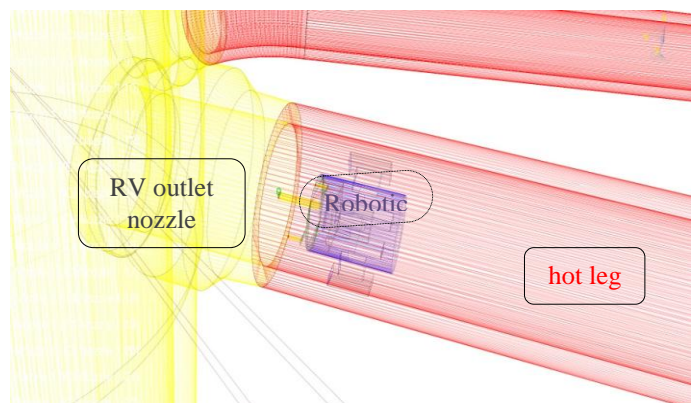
Internal robotic inspection at weld position (CATIA V5)
